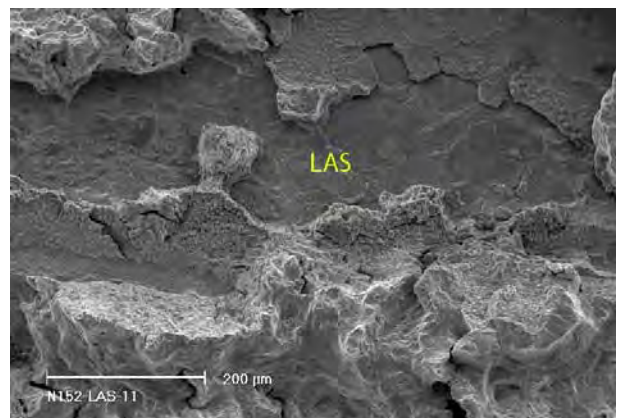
Fracture surface of specimen N152-LAS-11 at location 1 in Fig. 21. Crack advance is from bottom to top.
